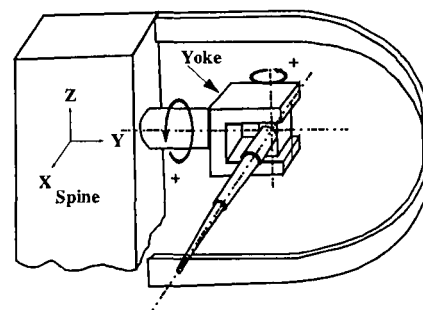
TAD Double Gimballed Stringpot Assembly (DGSP)
